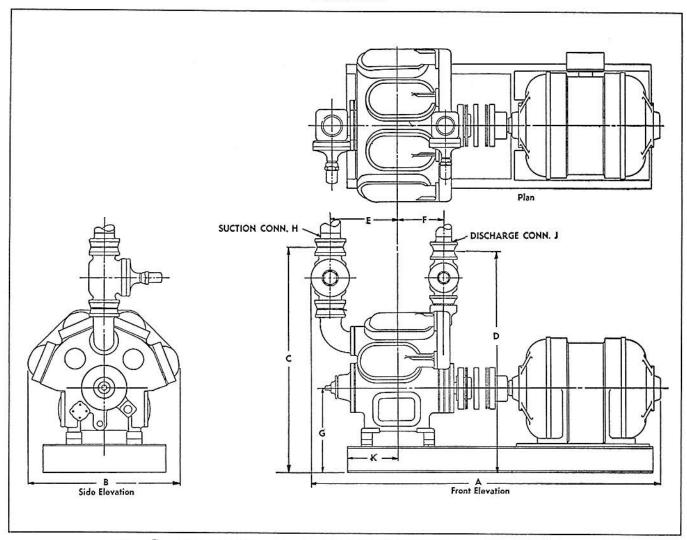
Dimensions - 4_{\bullet} 6 and 8 Cylinder Freon - Direct Drive
